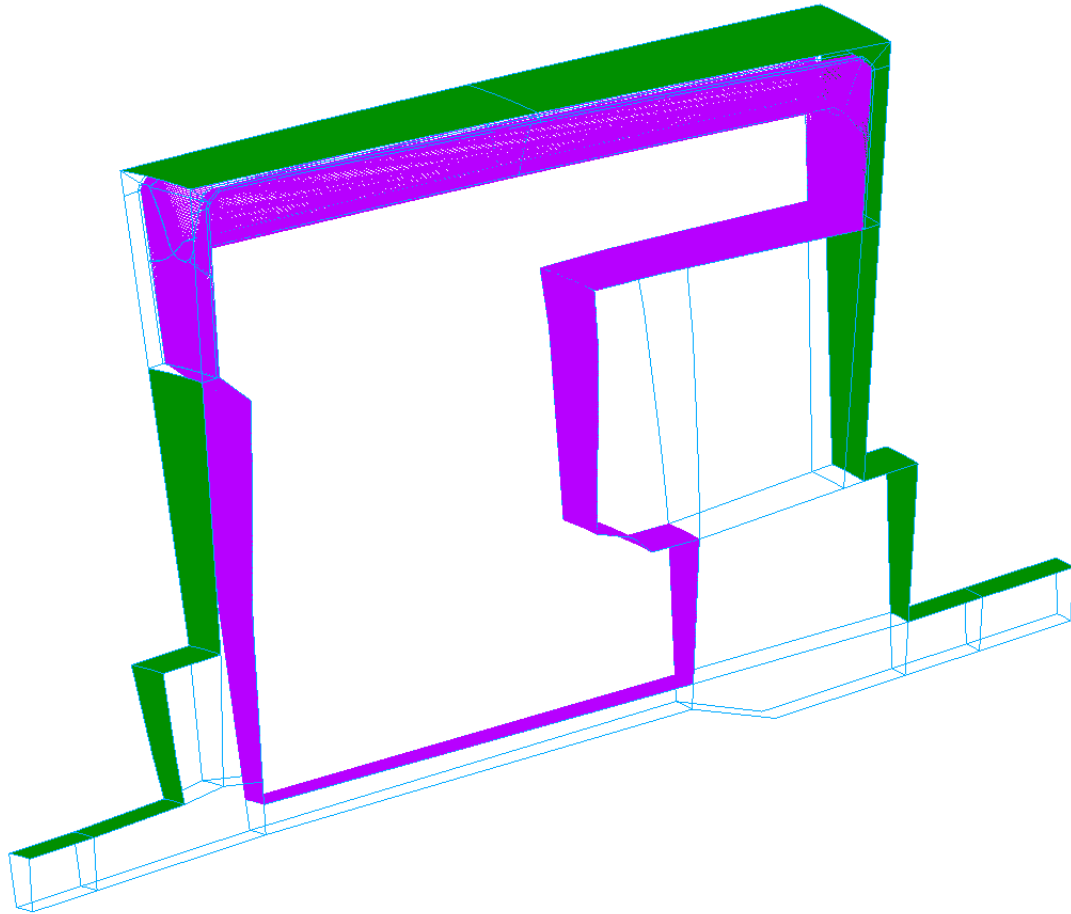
Shrouded Bell 51-tooth helical gear grid domain.
